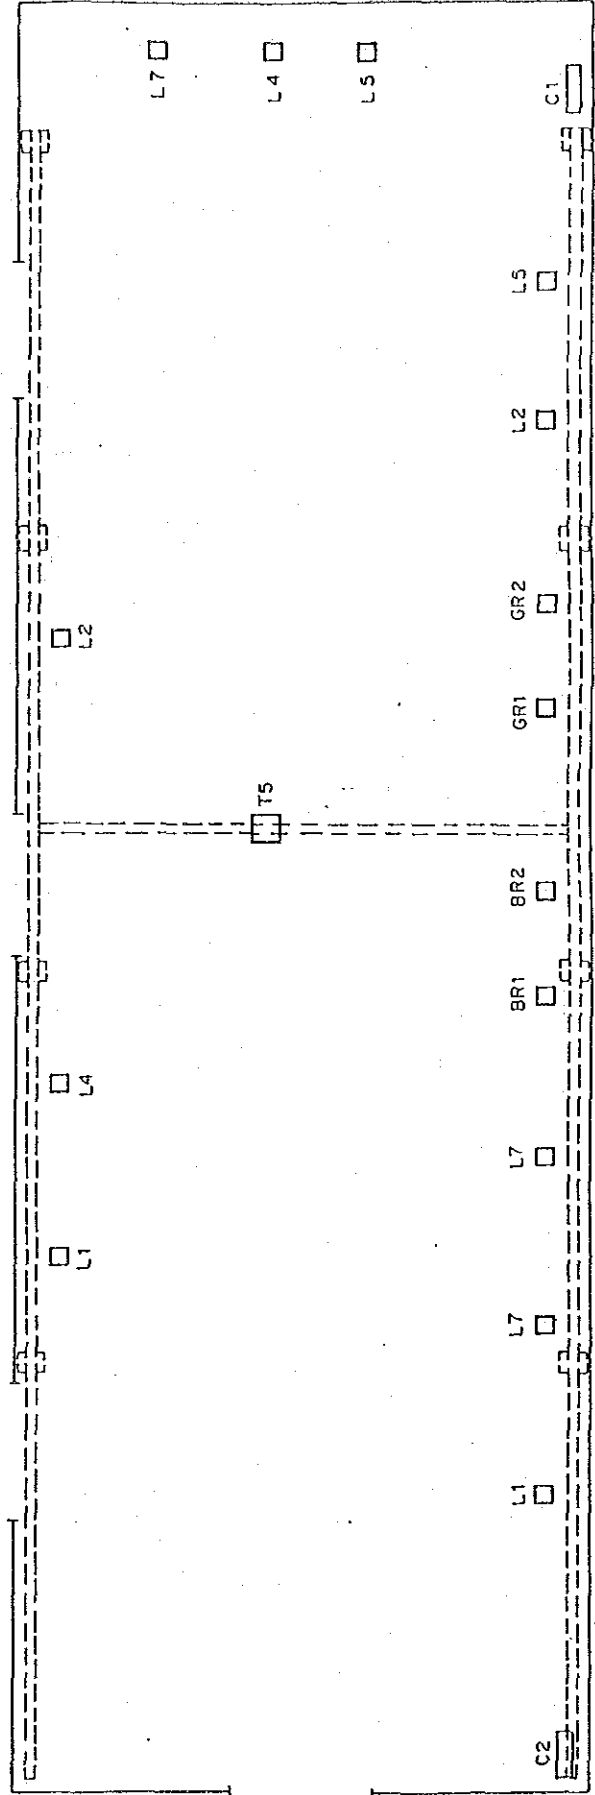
Arrangement of Assembling Shop No.8 for Large Size Components
